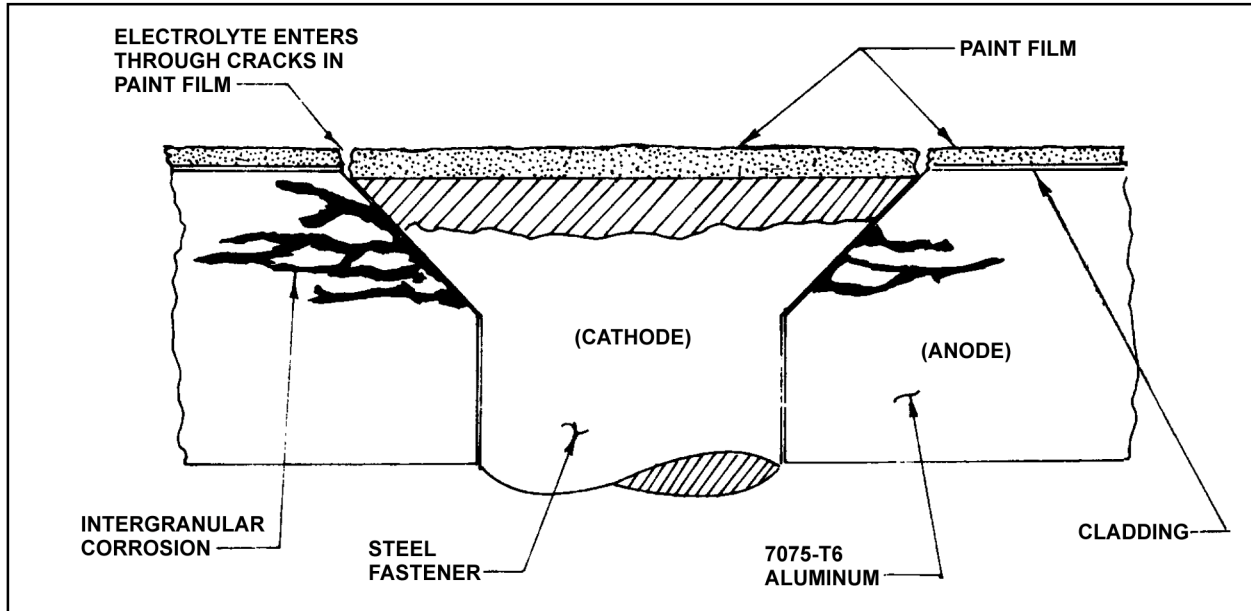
Inter-granular Corrosion of 7075-T6 aluminum adjacent to steel fastener.
